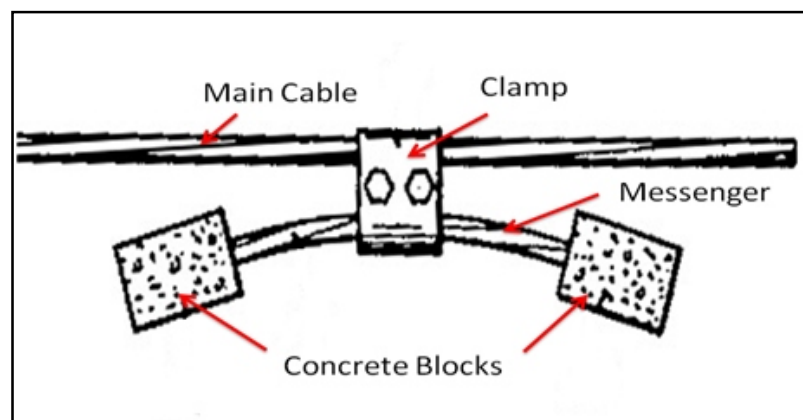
Original concrete block design of Stockbridge damper [22]
